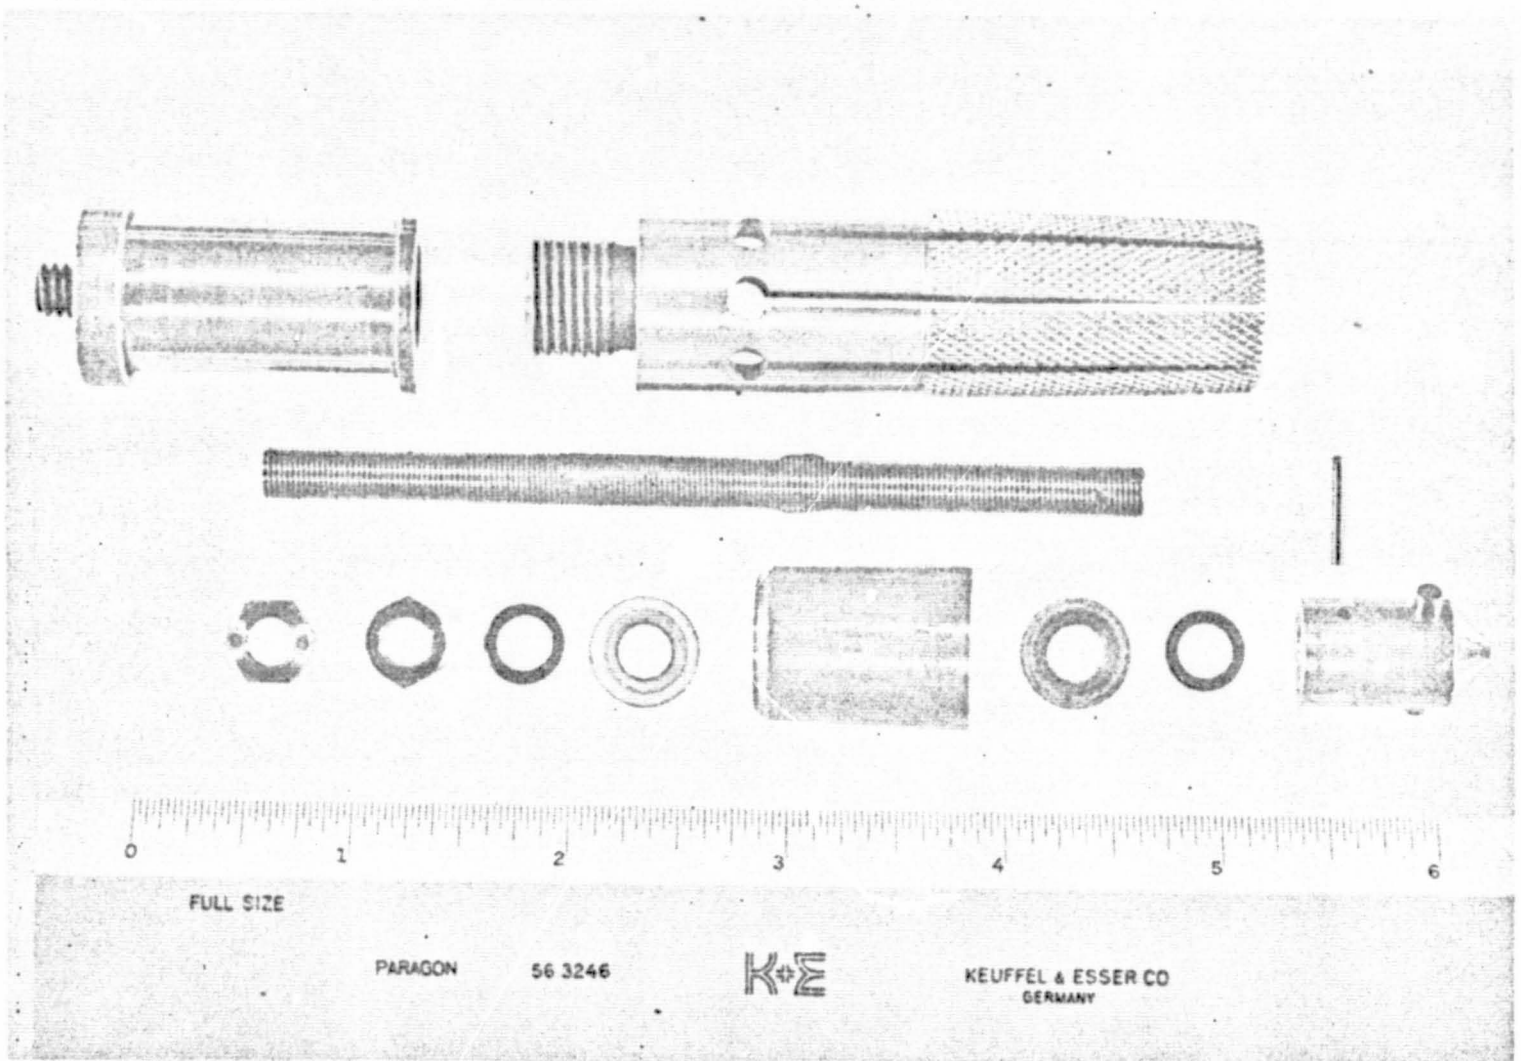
Parts of a Prototype core lock of a design similar to the final design.
